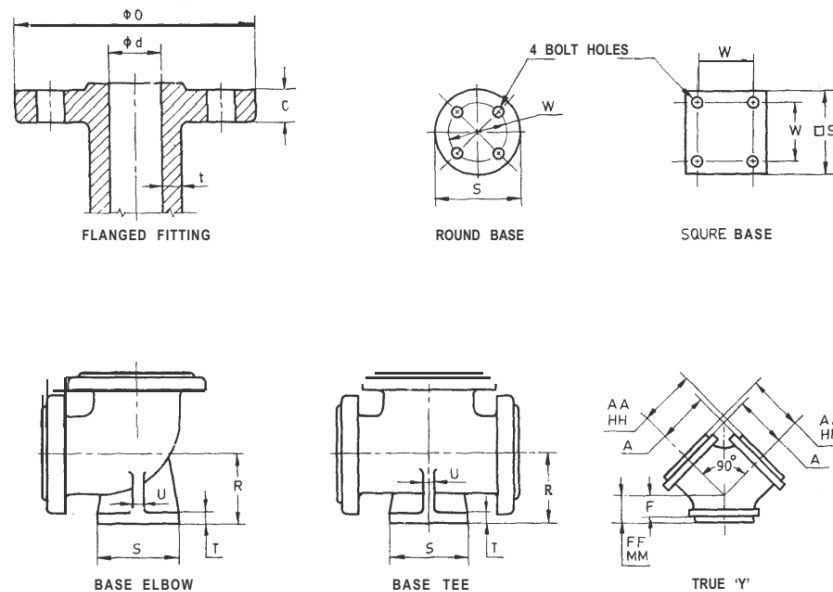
LEGEND KEY FOR DIMENSIONAL TABLES 16 TO 21
